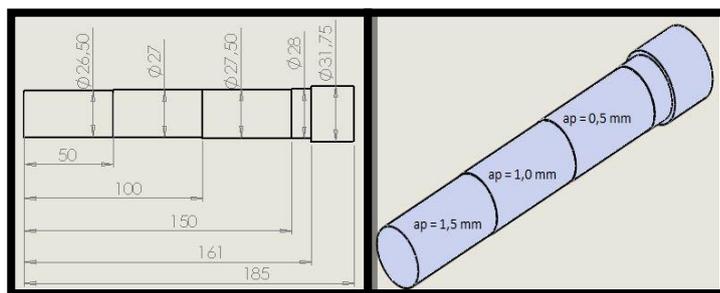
Final diameter of the 1020 Steel bars (left) and depths of cut (right.)
